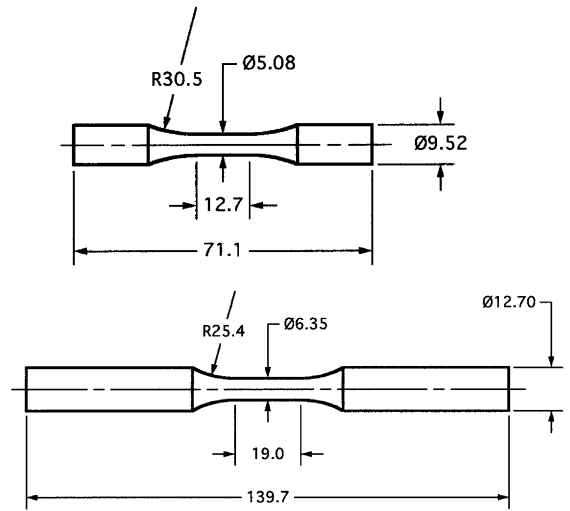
ORNL fatigue specimens. Dimensions in millimeters.
